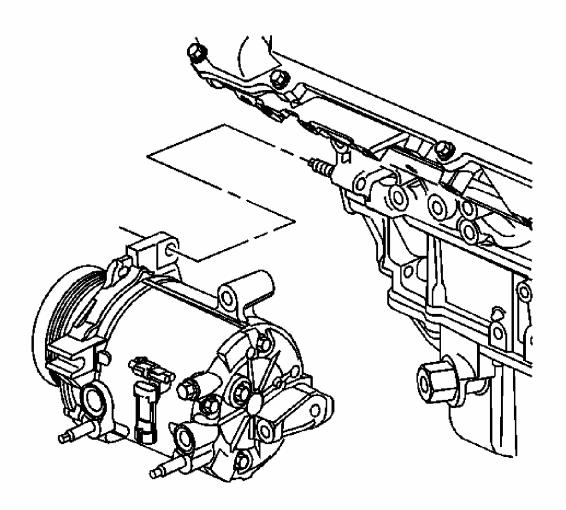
View of Air Conditioning Compressor Courtesy of GENERAL MOTORS CORP.
